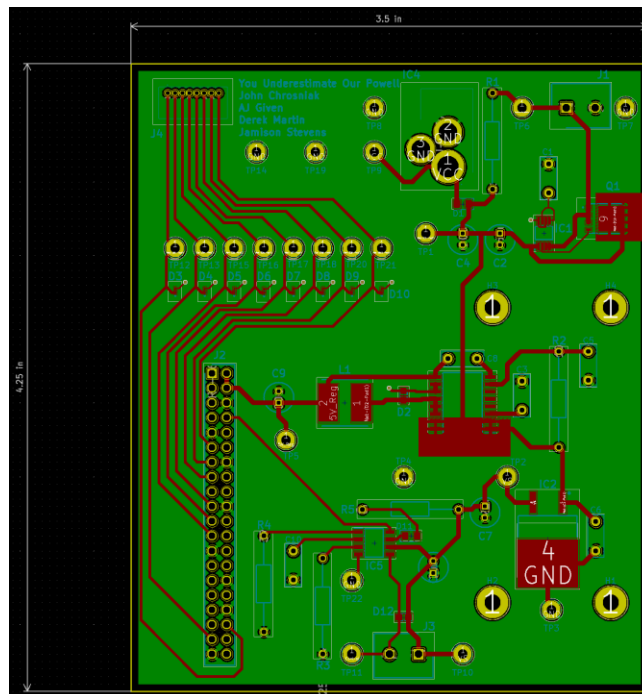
KiCAD PCB Layout with Ground Plane and Dimensions Showing
